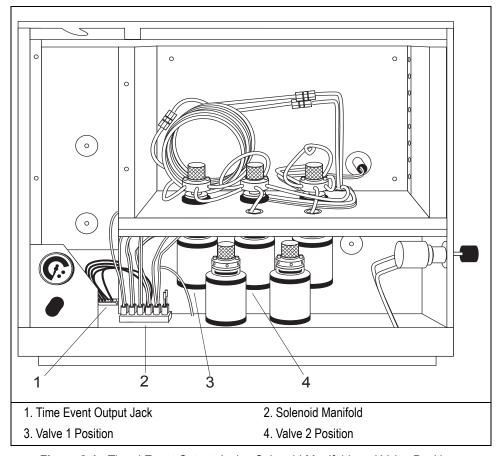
Timed Event Output Jacks, Solenoid Manifold, and Valve Positions
